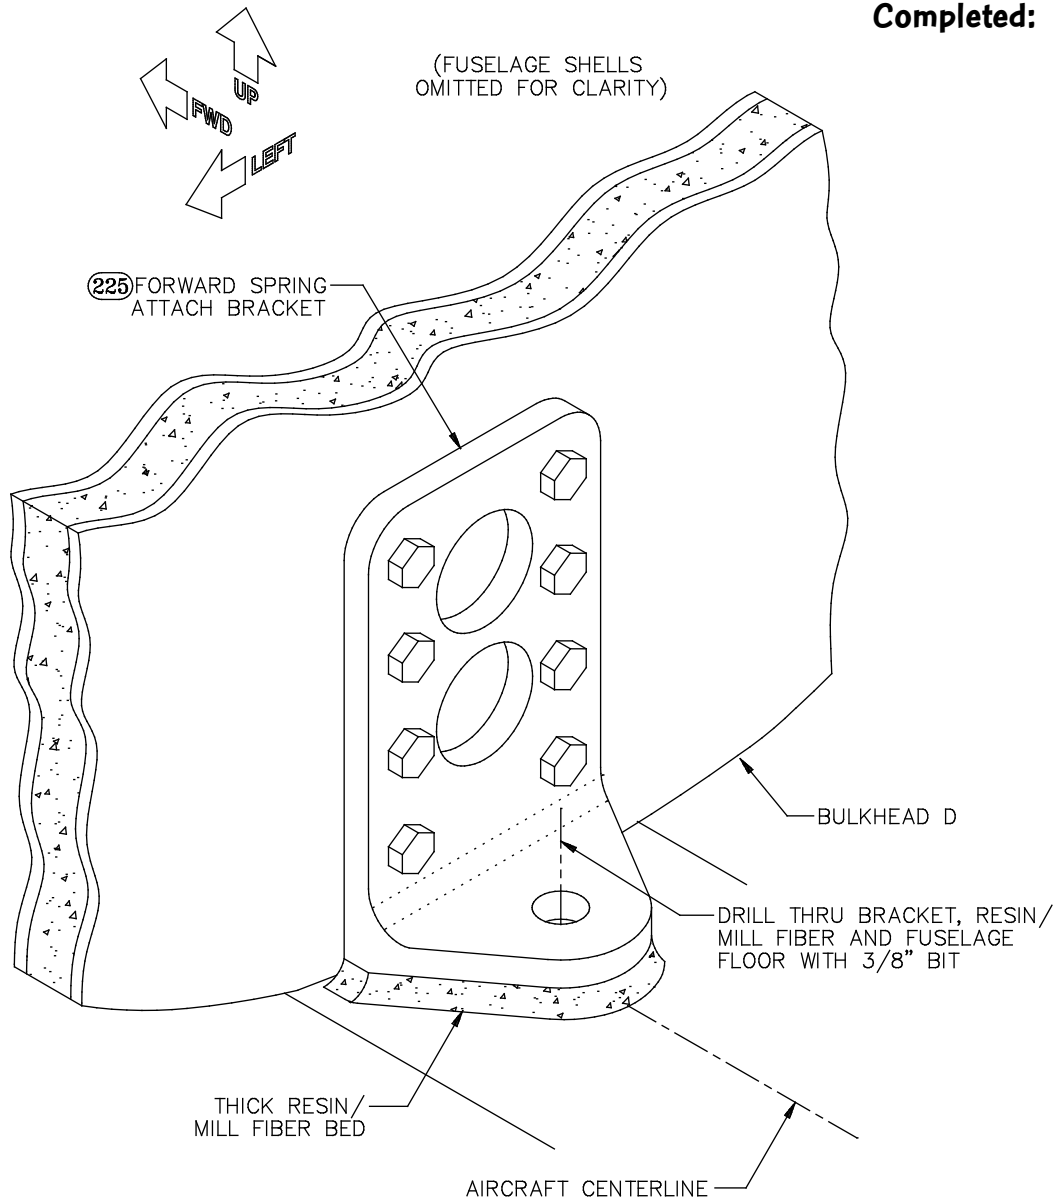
Drilling the Forward Spring Attach Bolt Hole
